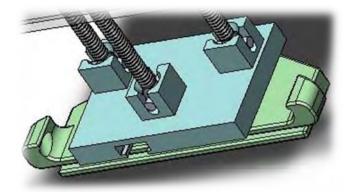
Modified design of the mating between the screw shafts and the top plate. This view shows a more detailed image of how the two components mate.
